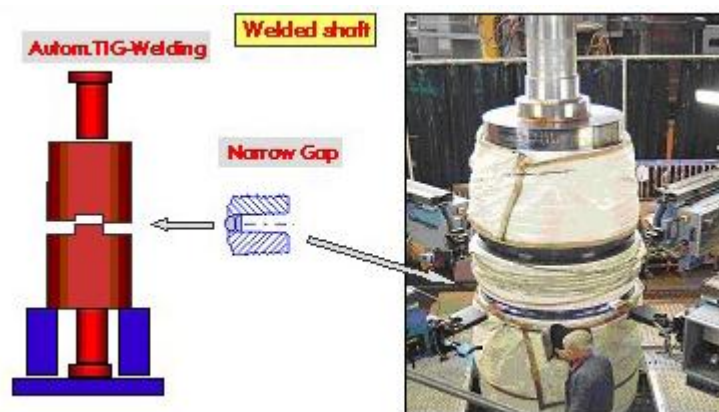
Vertical welding process [Kellner S., Balbach W. 2007]
